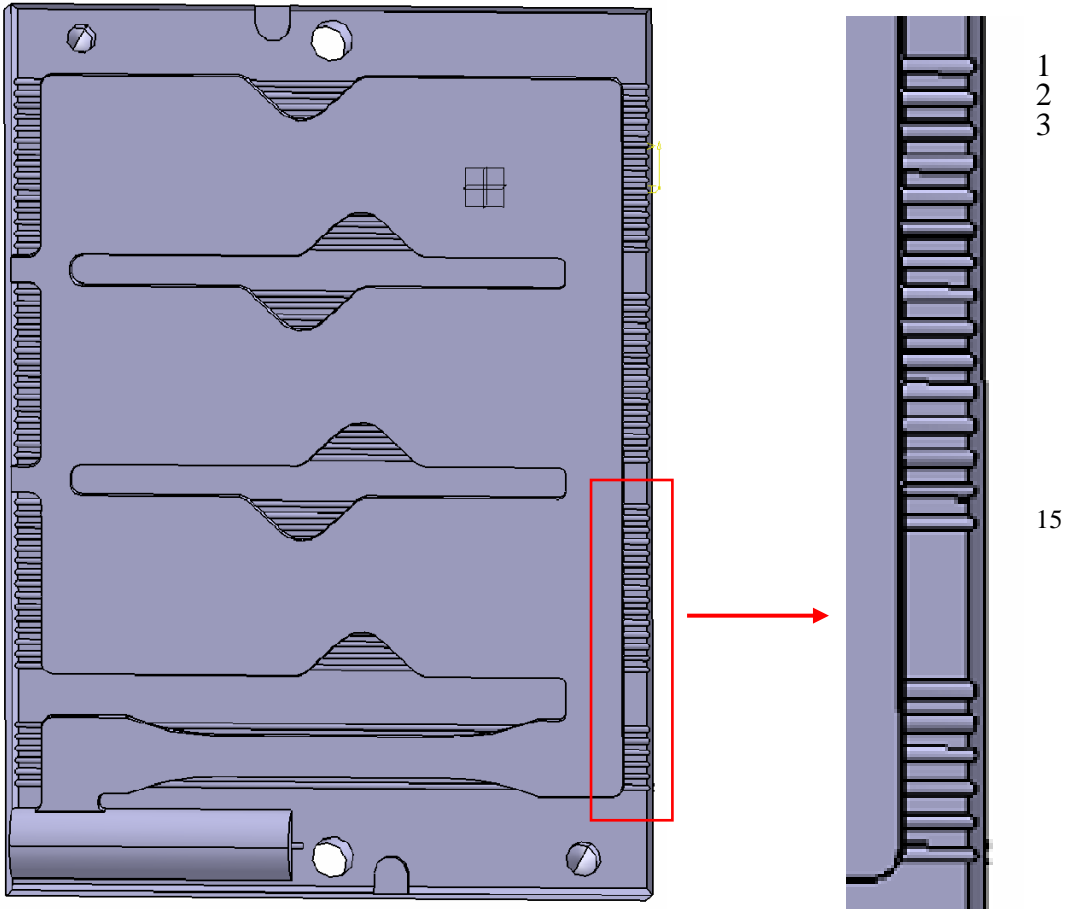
The mould using to prepare the simple tensile samples and the specimens with complex geometry
